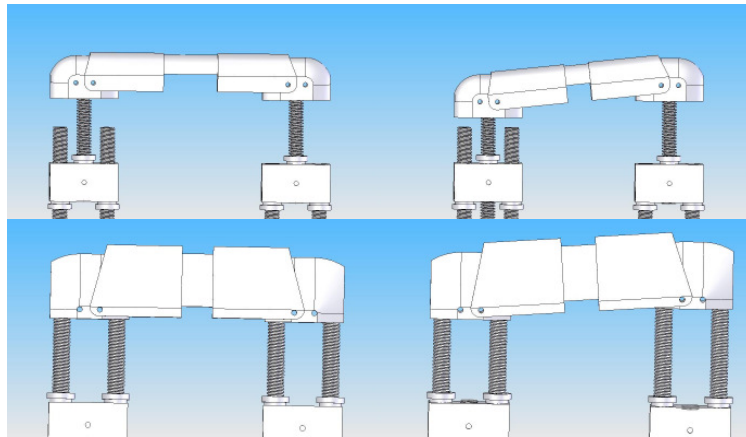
Leading and trailing edge beams assembly with the rib expansion mechanisms:
